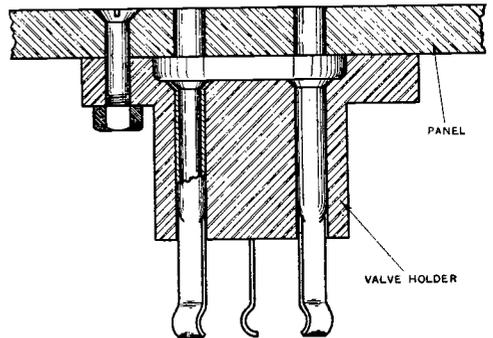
Sketch of a valve-holder which is designed to be fitted below the panel.
